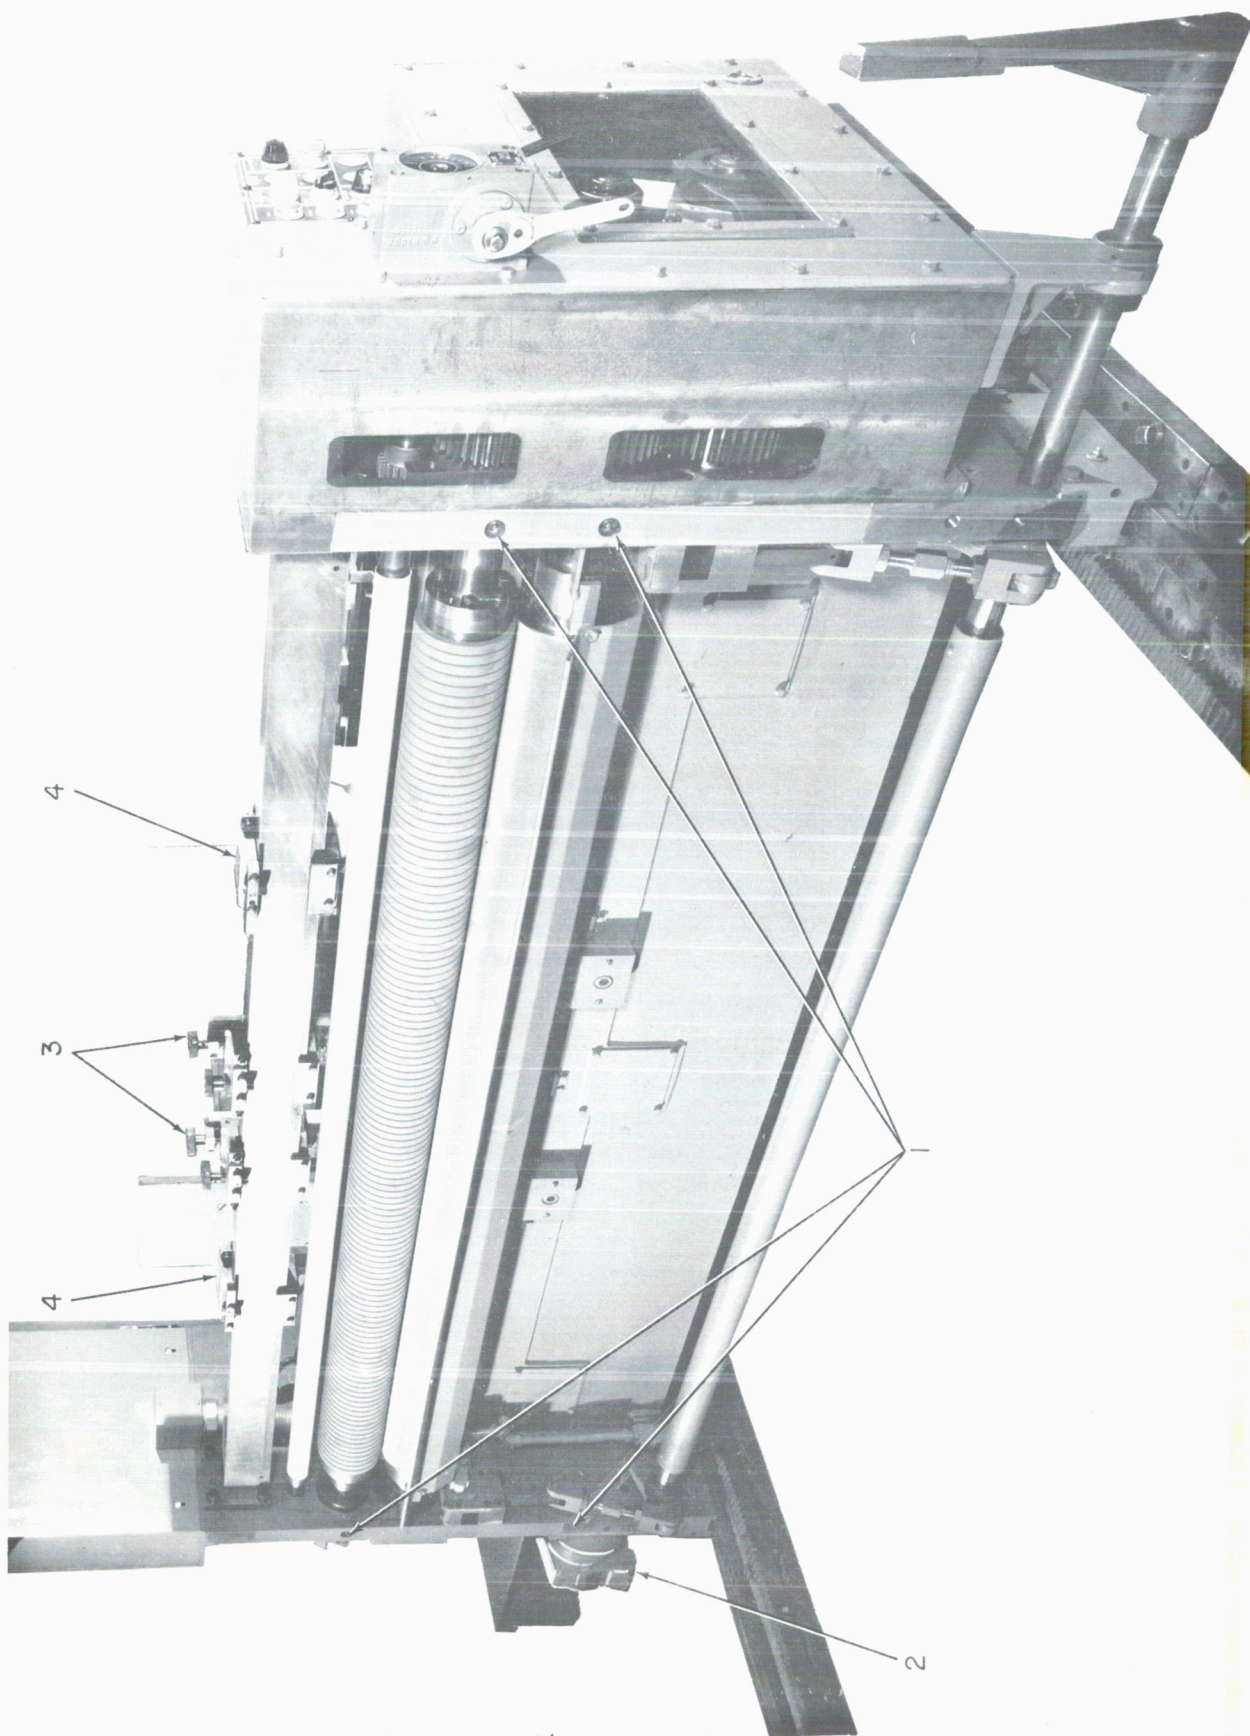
FEED SECTION LUBRICATION, DELIVERY END VIEW
